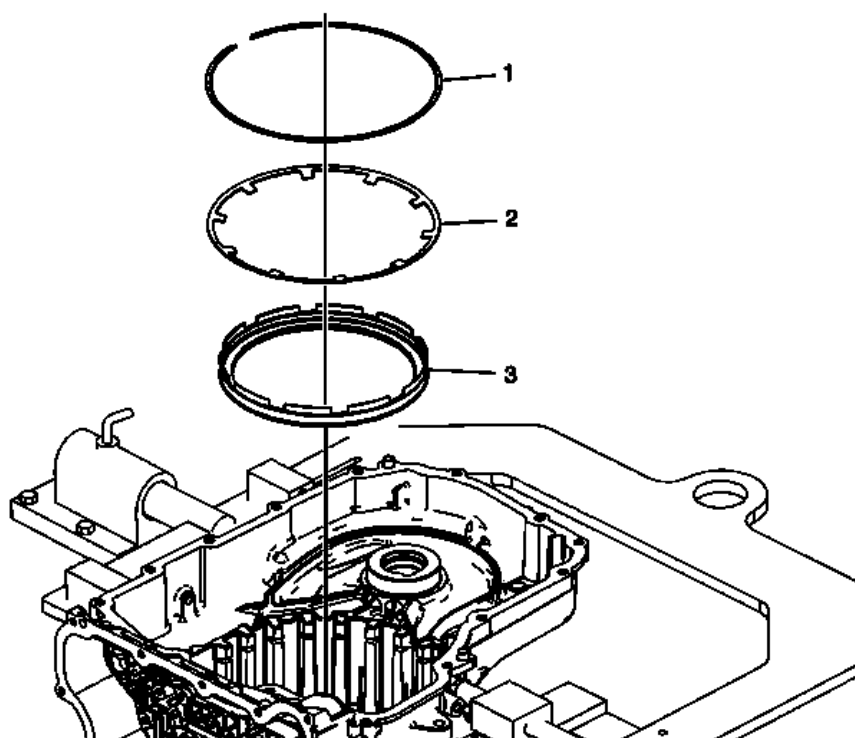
View Of 2-6 Clutch Piston & Attached Components
